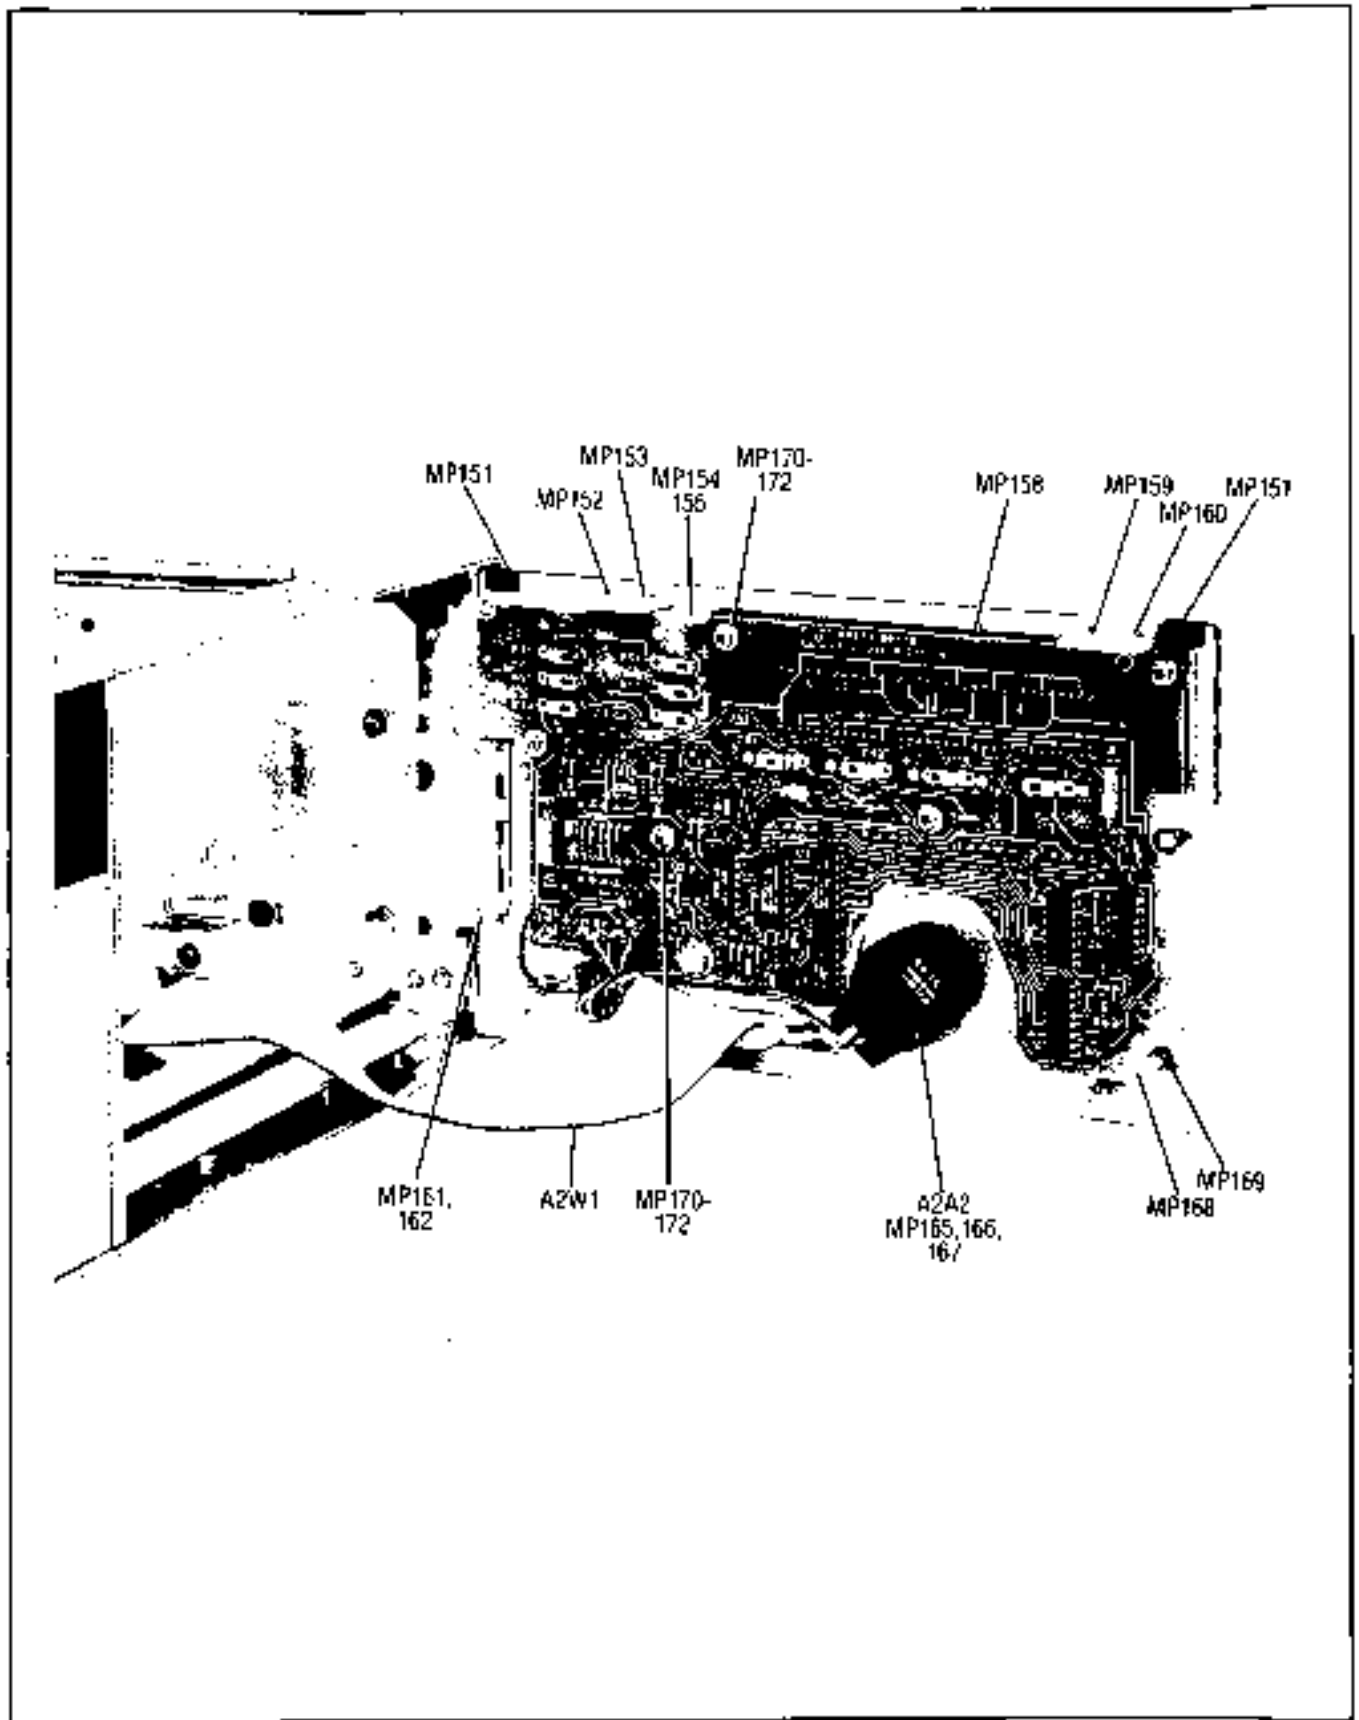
DCU Front Panel, Inside View (Right Side)
